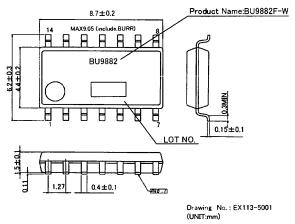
(b) PHYSICAL DIMENSION SOP14(BU9882F-W)
